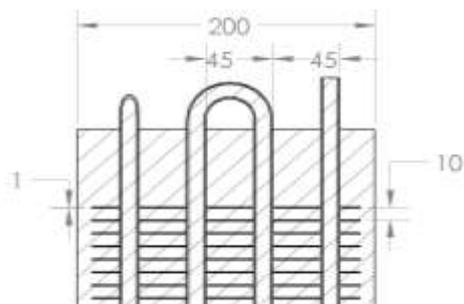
Section drawing of the finned heat exchanger (all dimensions in mm)
